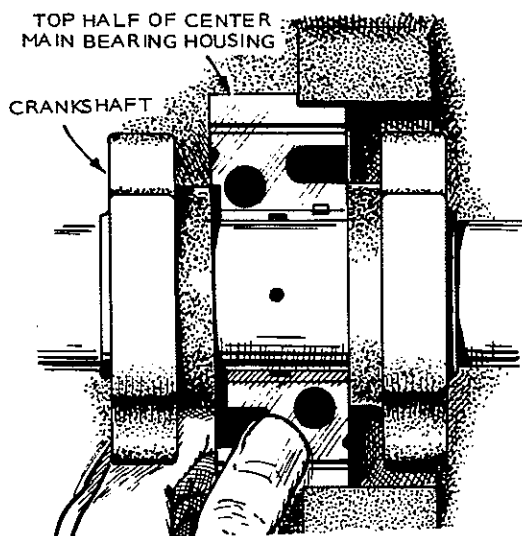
CATCHING CENTER MAIN BEARING SUPPORT
